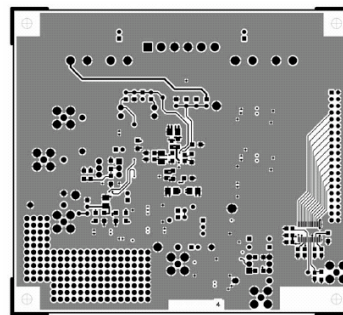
TSSOP Evaluation Board Layout, Secondary Side
